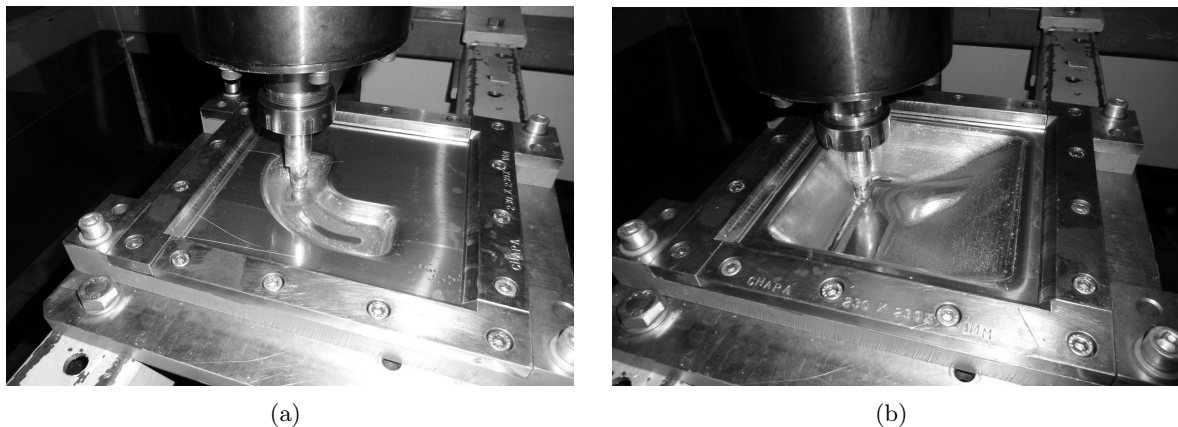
SPIF operation forming the rotomoulding sheet metal mould: (a) lower side part
